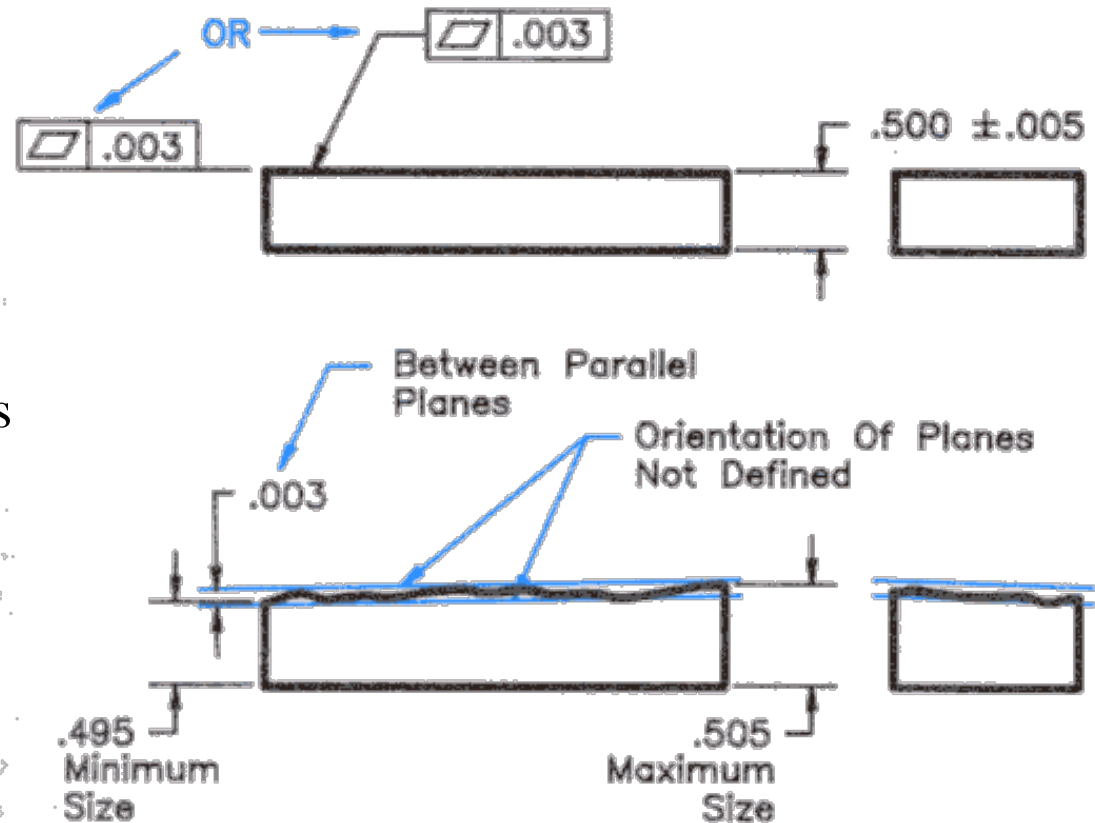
Flatness tolerances create a tolerance zone bounded by two parallel planes.
